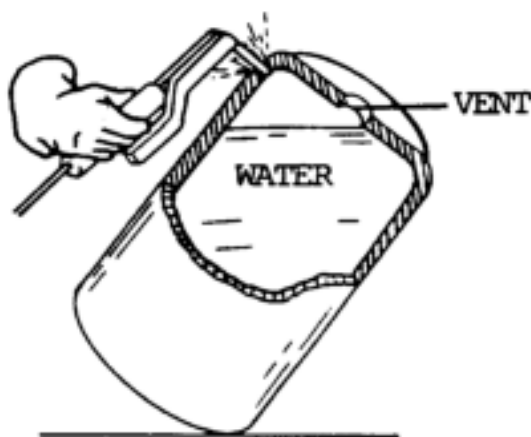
Safe way to weld container that held combustibles.
